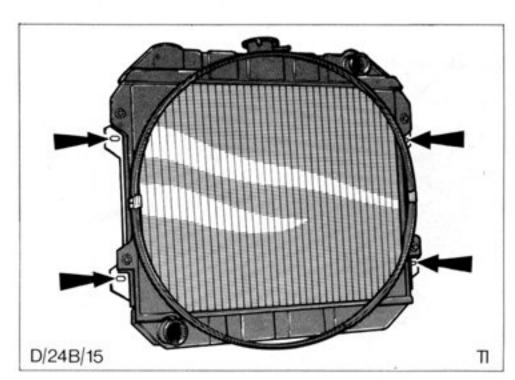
Radiator securing bolt holes (radiator removed from vehicle for clarity).
